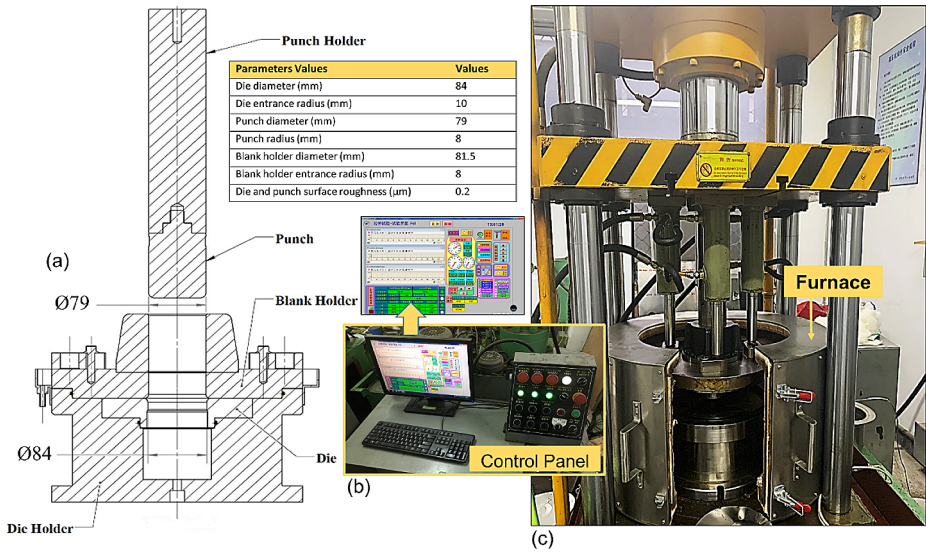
Press Machine, (a) mold dimensions, (b) control panel, (c) hydraulic press
